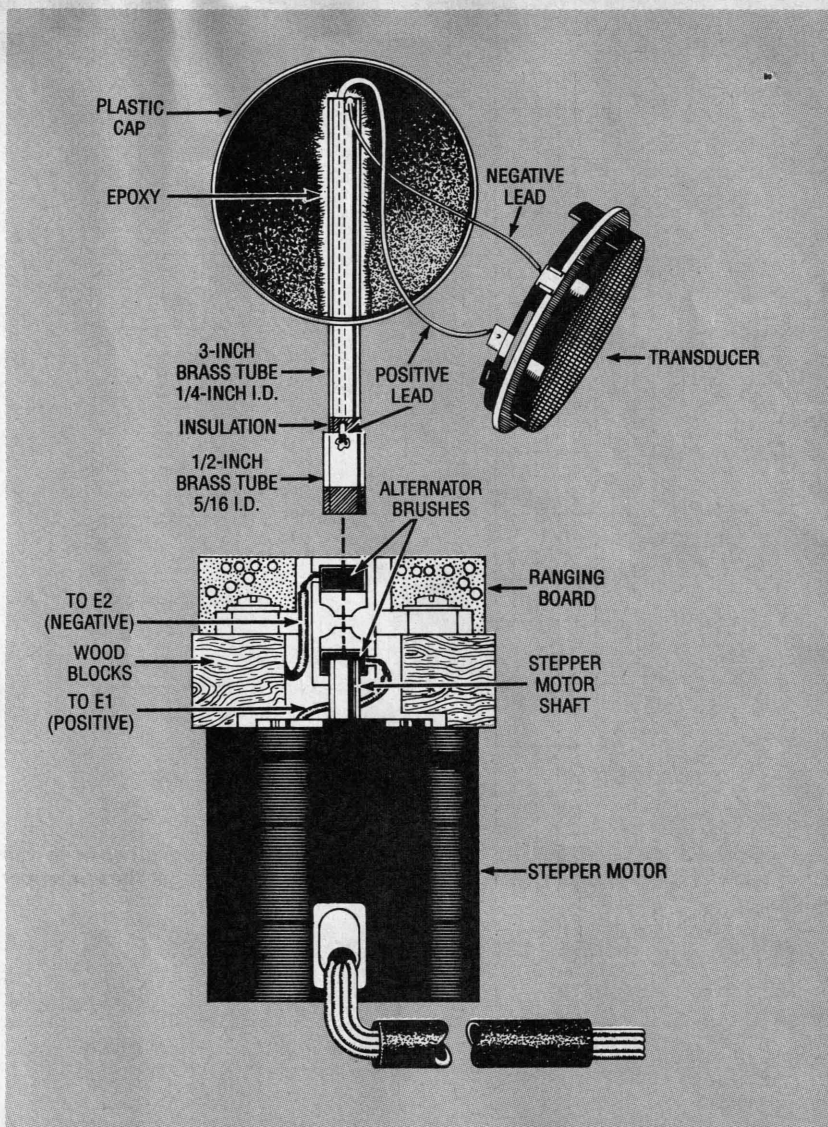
TWO ELECTRICAL CONTACTS must be maintained while the transducer rotates. Here's how that was done on the prototype.
